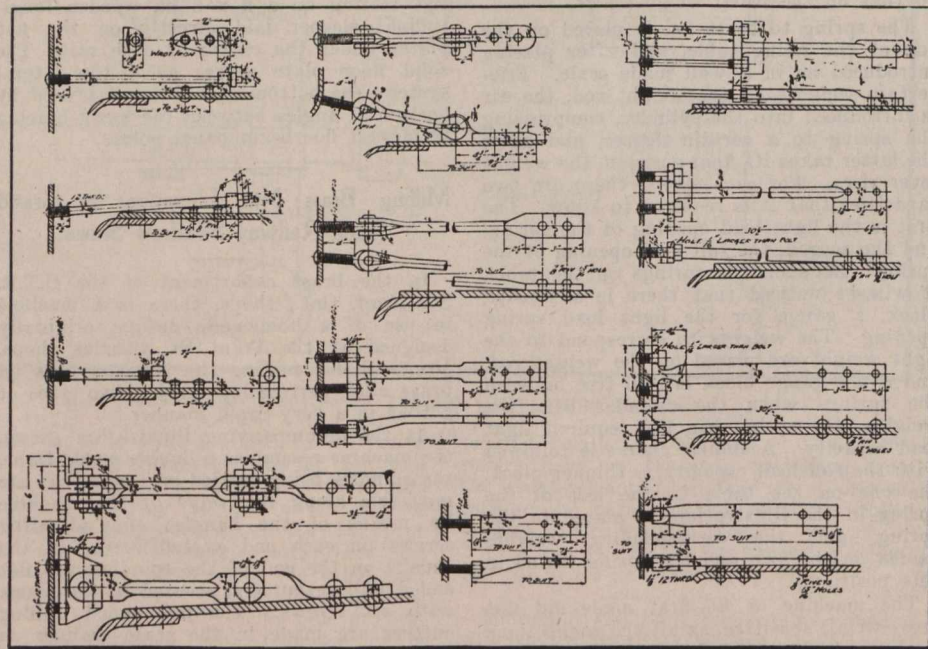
Twelve Styles of Throat Sheet Belly Brace.
